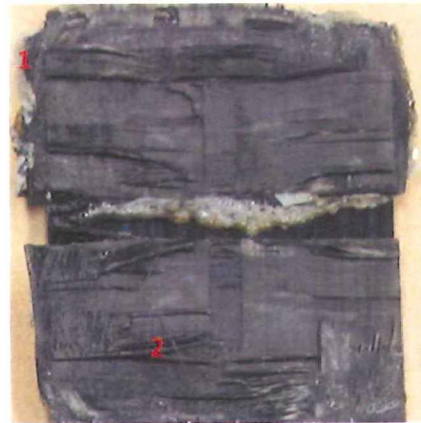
The related fracture surfaces of USW140804-20 clamped at 1.5 [cm] and with a torque of 2.5 [Nm]. The sample shows 1) fiber squeeze out, and 2) intense first ply failure.
